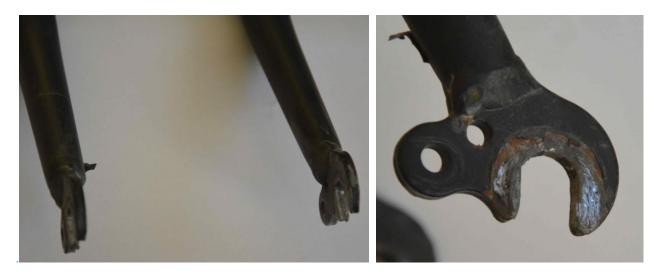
The steel front wheel mounts and detail of magnification opening handle
